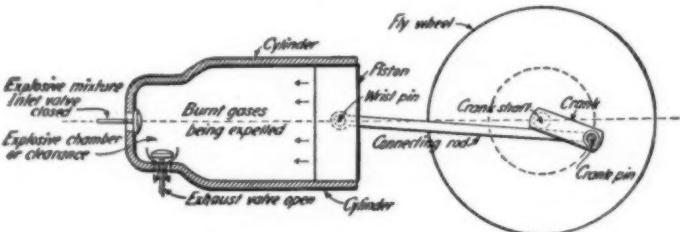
DIAGRAM SHOWING MECHANISM OF INTERNAL COMBUSTION ENGINE—EXHAUST STROKE.
